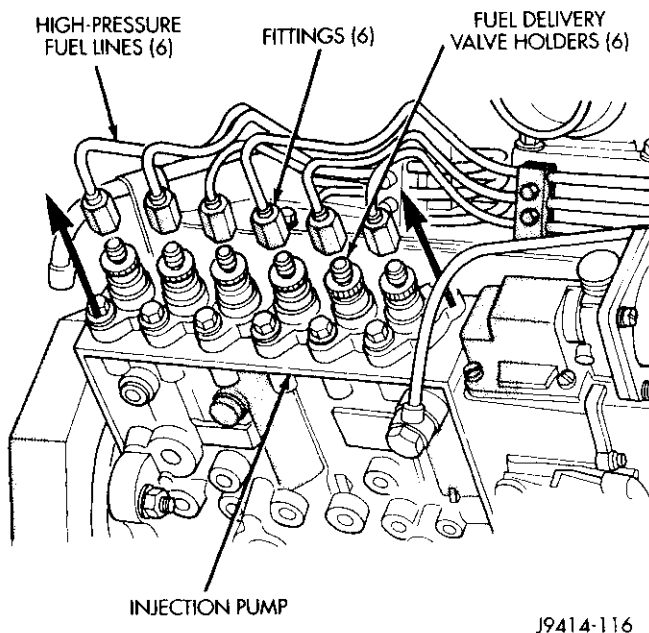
Fuel Delivery Valve Holders and Pressure Lines
